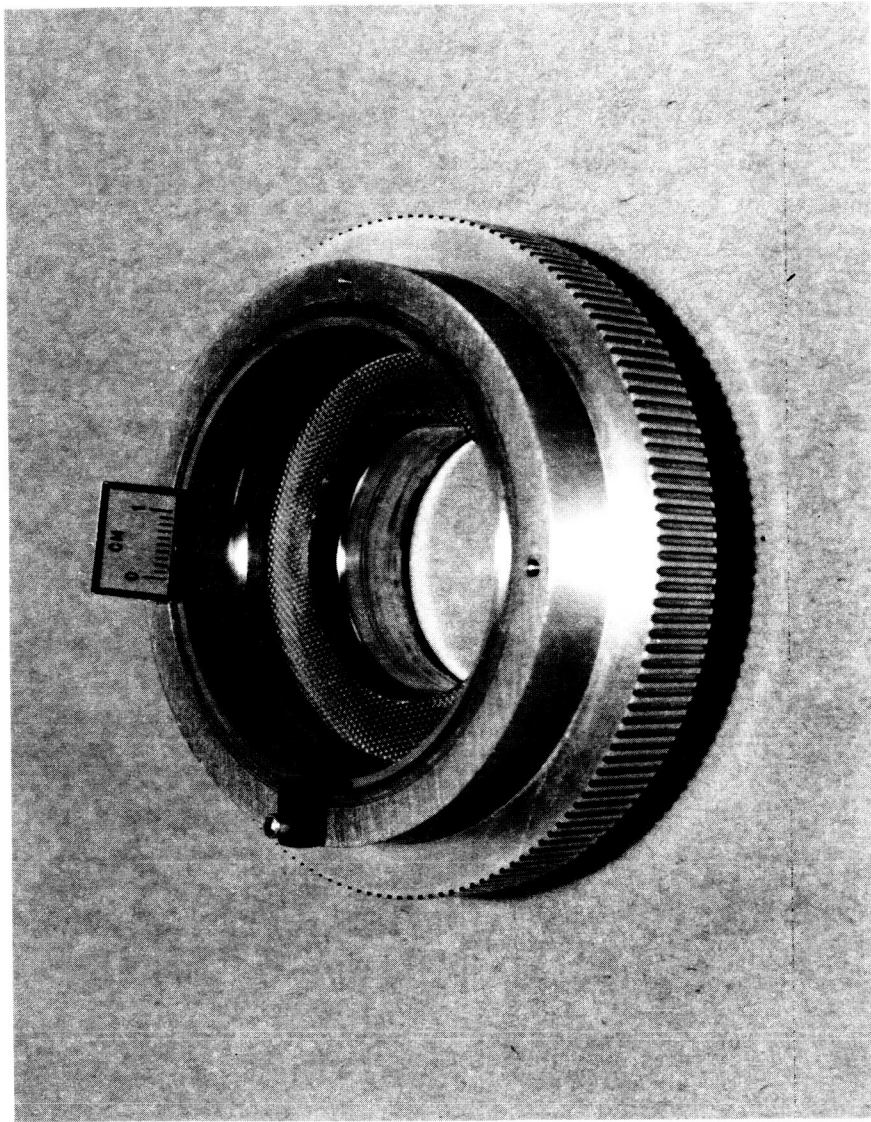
Test bearing mount showing outer race and insulating Bakelite separators.
